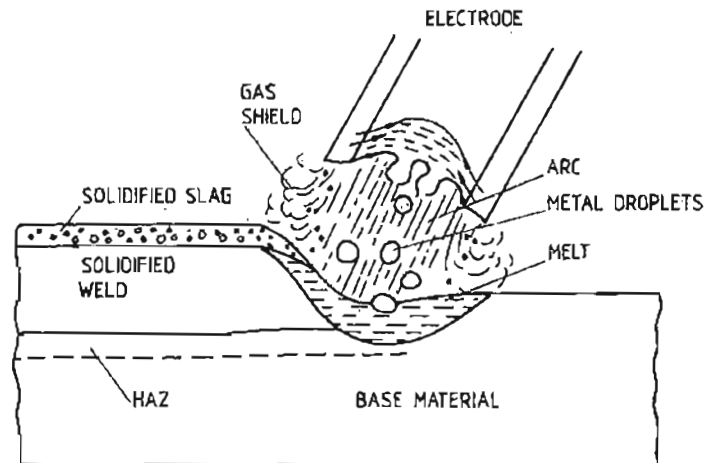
Manual metal arc-welding. Karlsson (1986)
